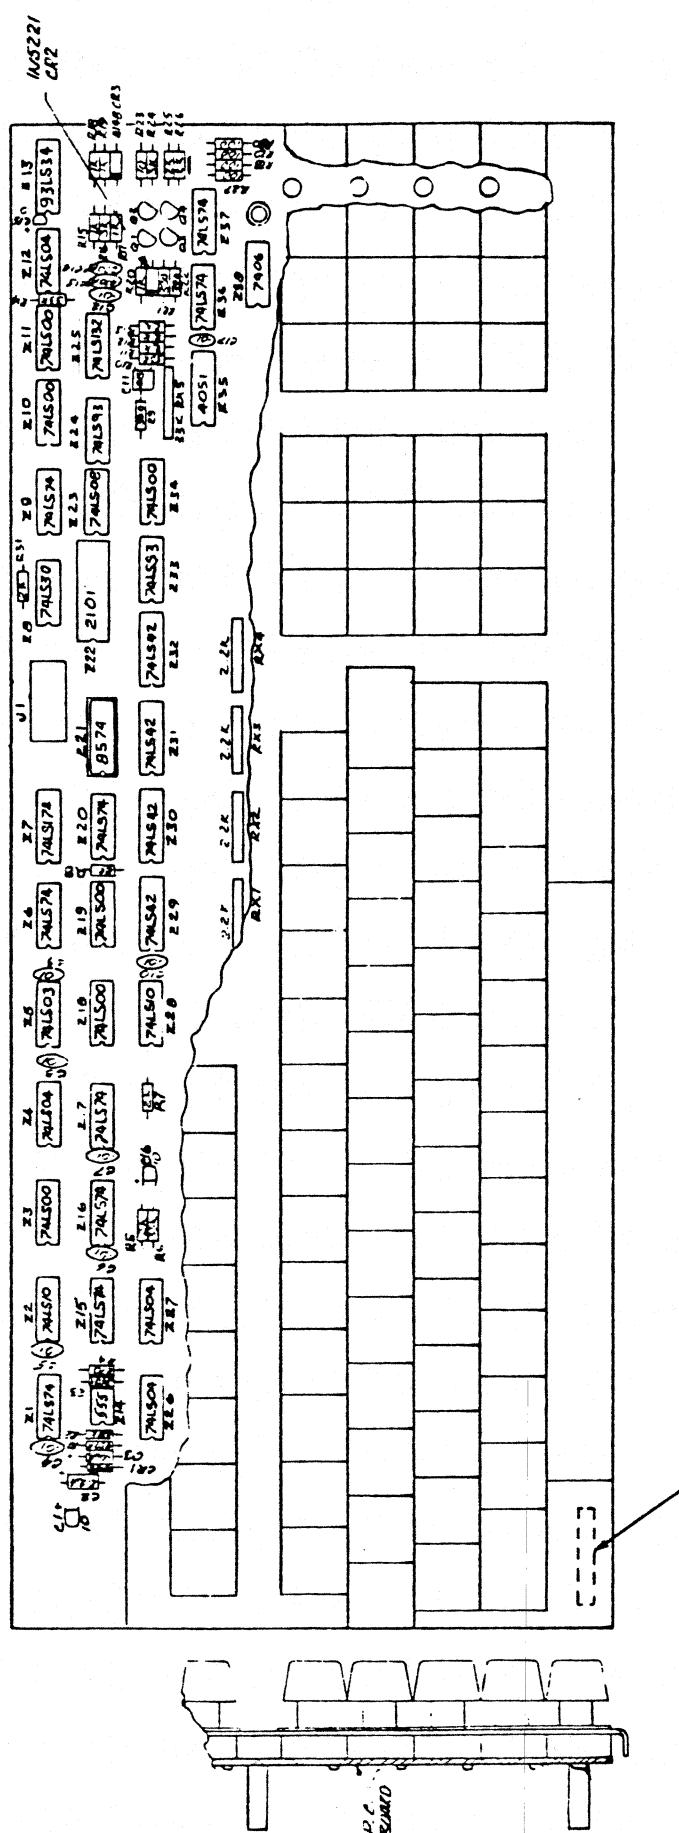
B100 Series Keyboard Assembly, 112-1326
